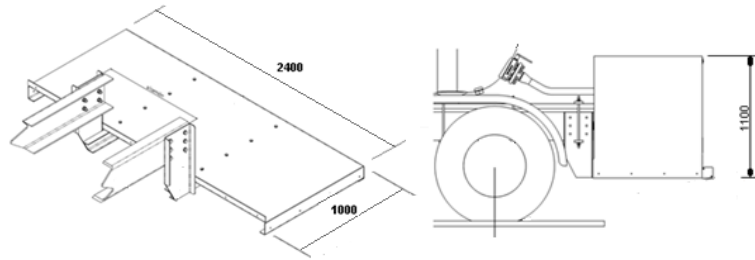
Main dimensions (in mm) of the Special System Drawer loading and unloading of the Tank
